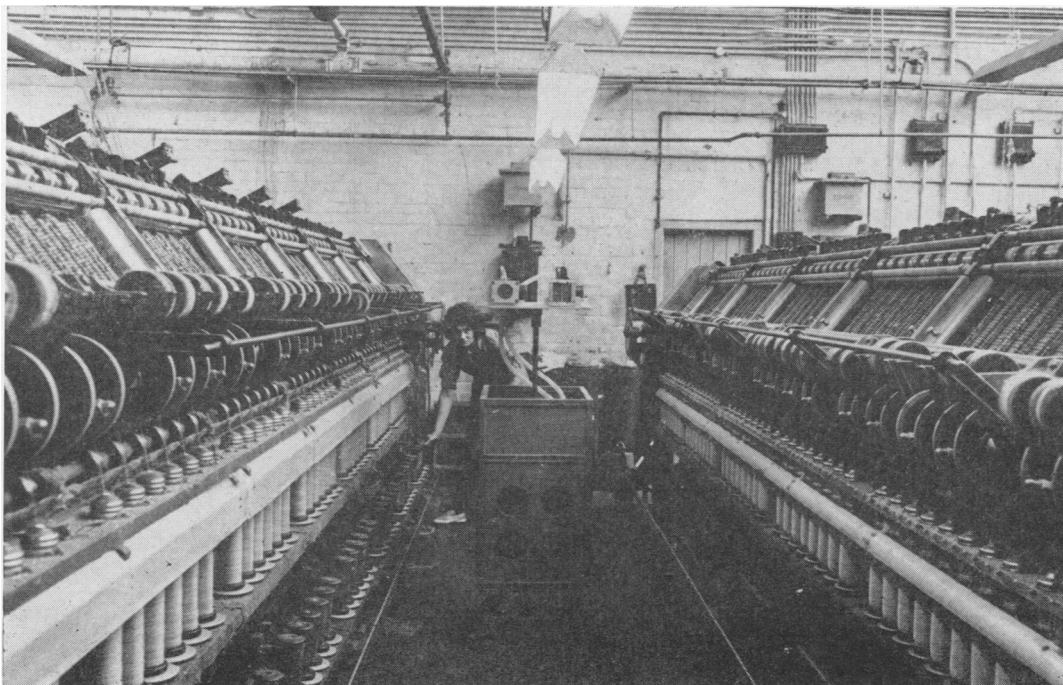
Inclined spinning machines for flax and hemp showing Hexhlet-Söxhlet apparatus collecting dust samples.
